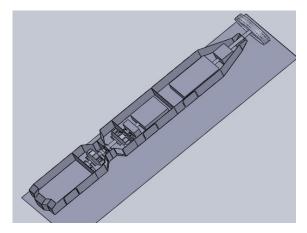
, Placement of machine, gear box, impeller for lift, impeller for thrust and holder (isometric view)
